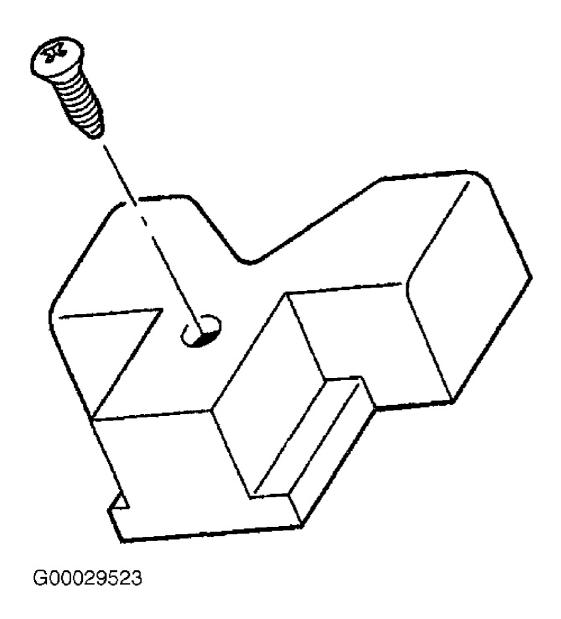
Identifying Sun Roof Assembly Cable Stop Courtesy of GENERAL MOTORS CORP.
